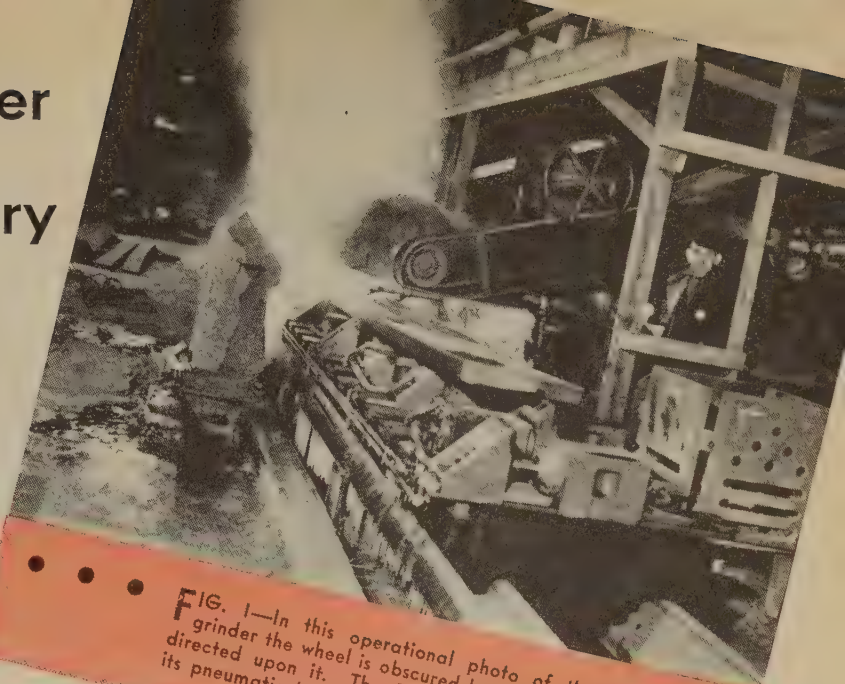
In this operational photo of the Hamilton slab grinder the wheel is obscured by the stream of water being directed upon it. The foreground shows the conveyor with its pneumatic holding vises. The wheel is at right angles to the long axis of the slabs.
